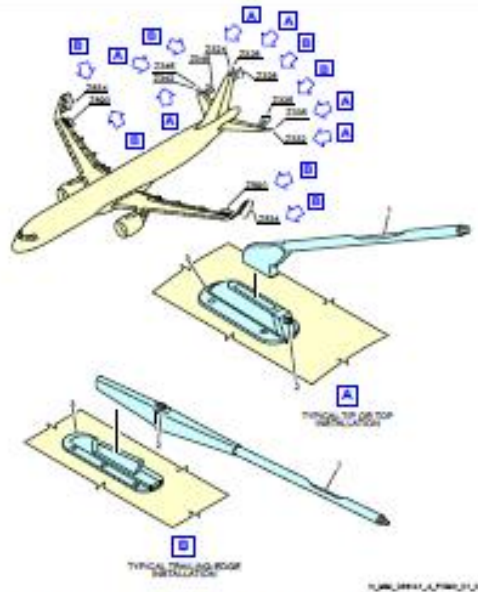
H (SHEET 1) - Static Discharger - Location and Detail
